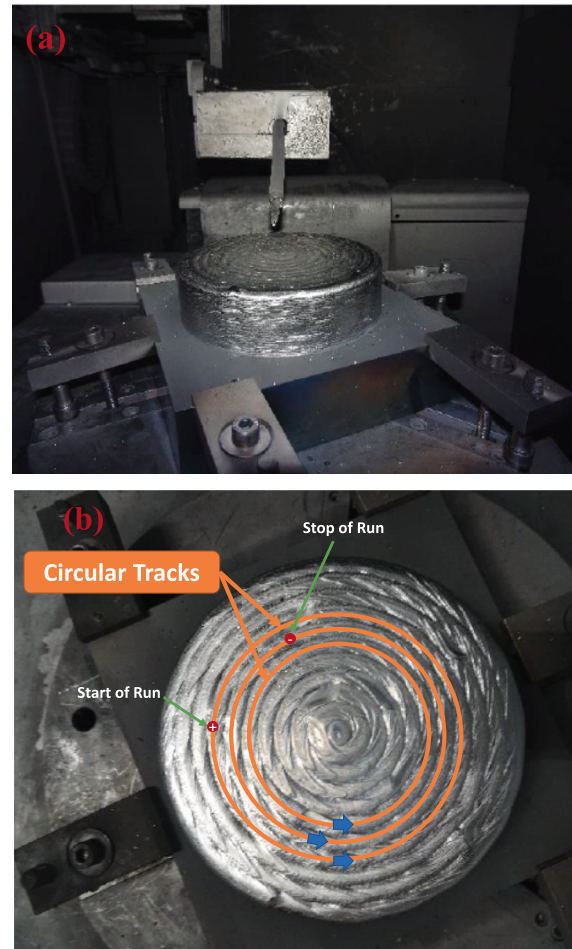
WEBAM distributor cylinder (a) during manufacturing; (b) cylinder with 11 circular runs per layer.
